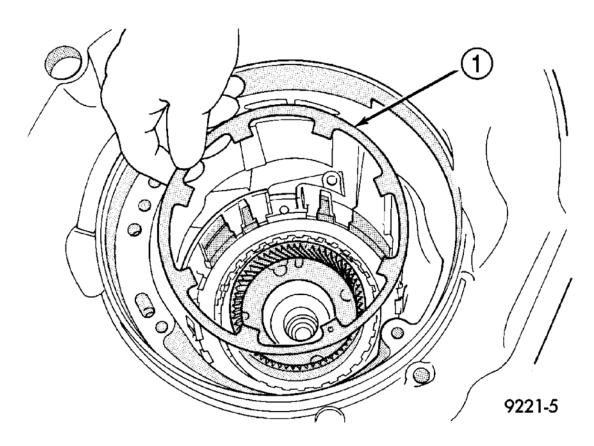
Installing 2/4 Clutch Belleville Spring Courtesy of CHRYSLER LLC
